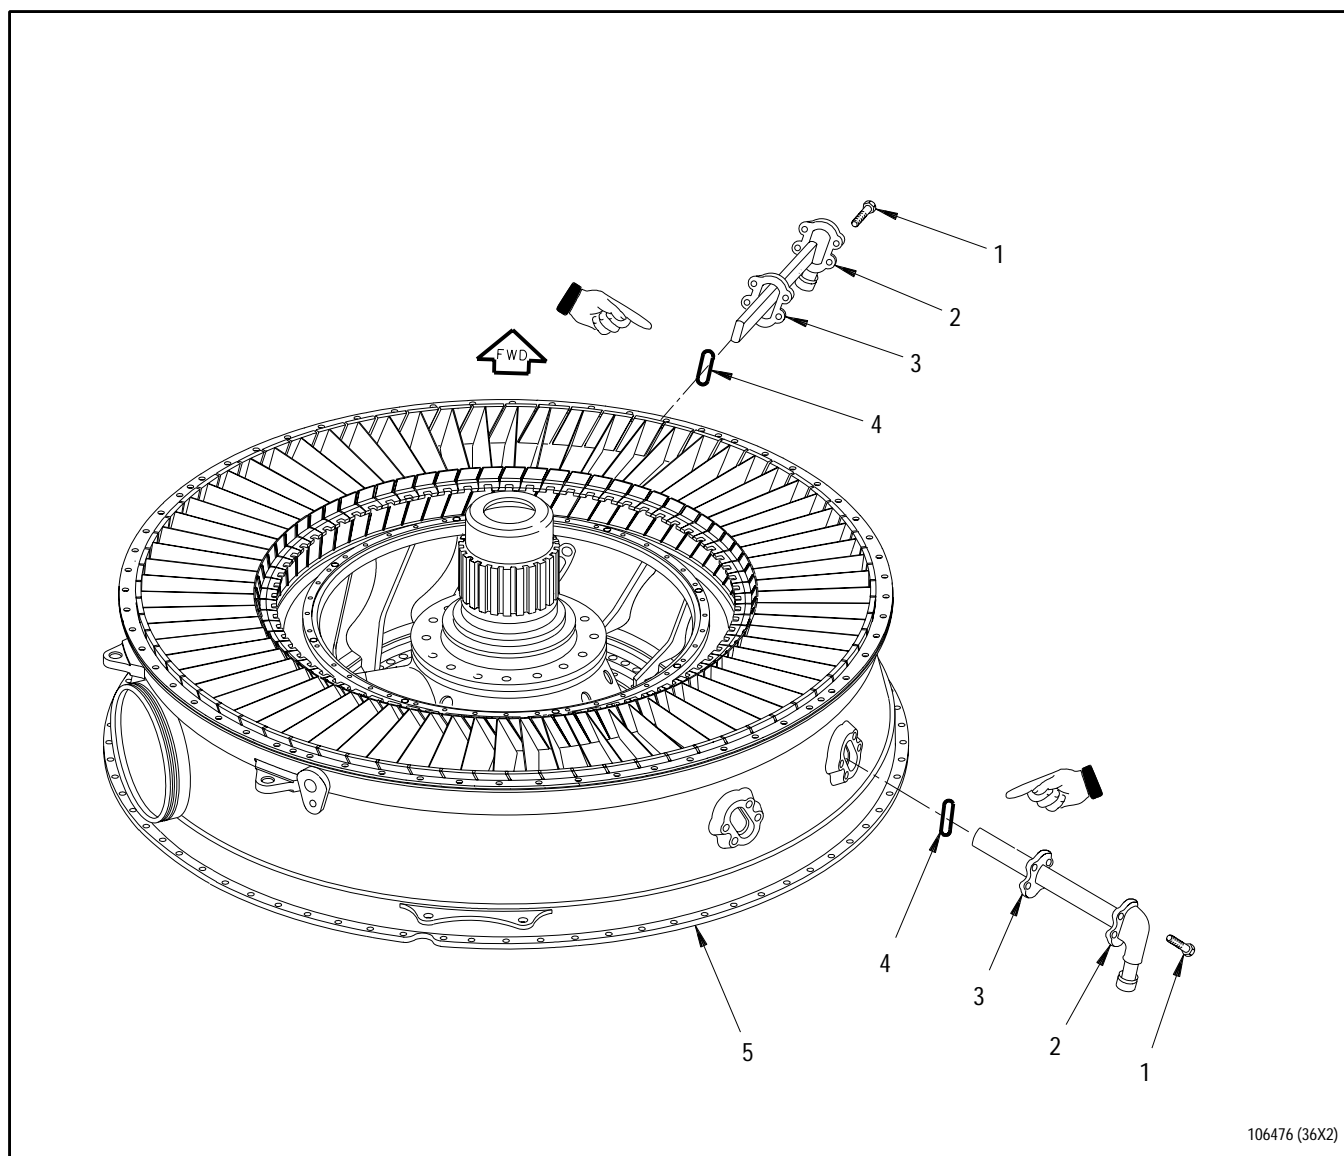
No. 2 and 3 Bearing Inner Oil Pressure Tubes - Installation (Typical Two Places)
